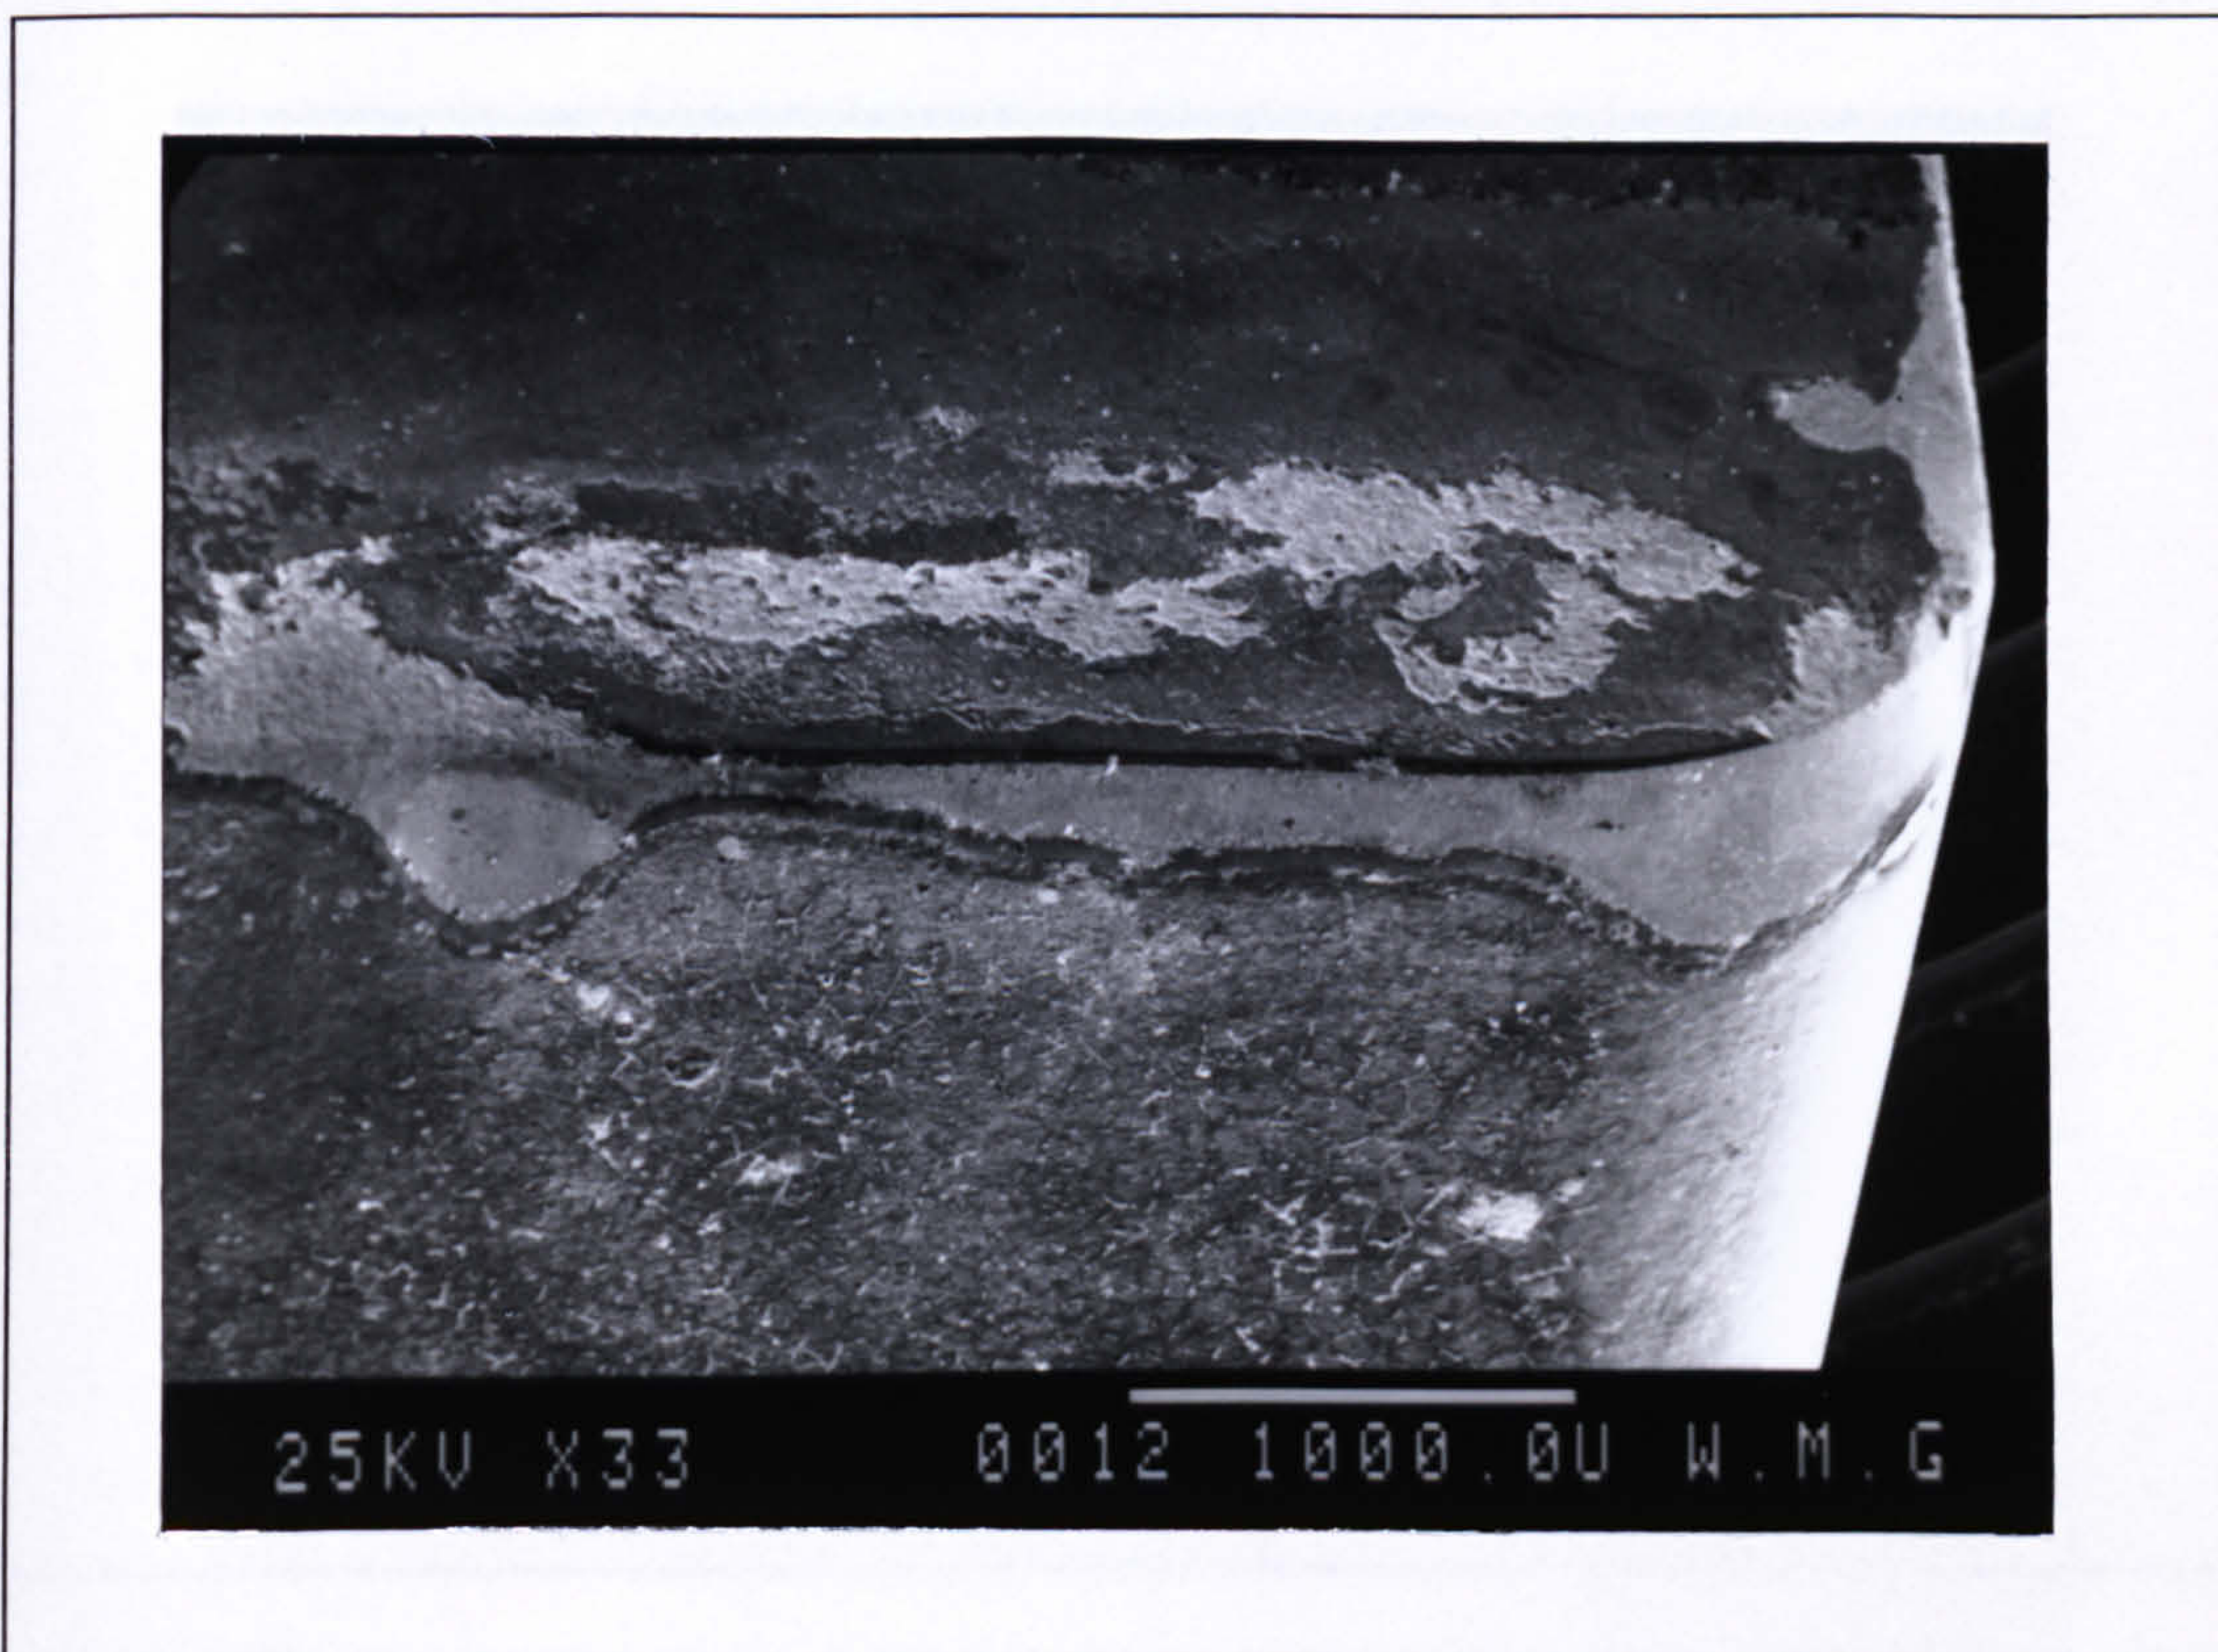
Overview Of K910 Insert Showing Lifting Off Coating After Machining ( $V = 20$  m/min, Feed = 0.6 mm/rev, DOC = 2 mm)
